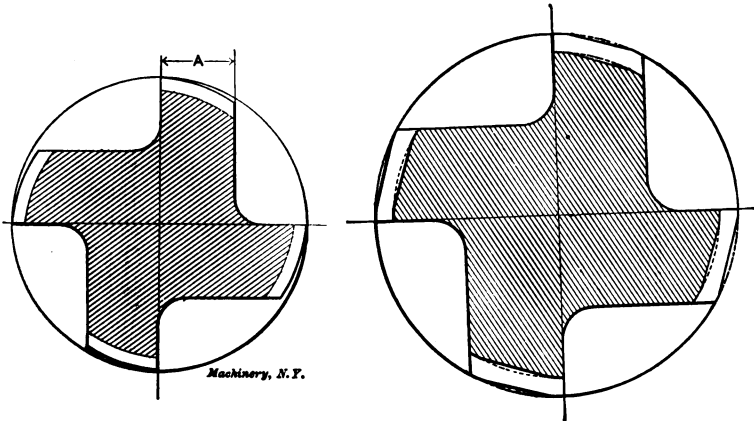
Section of Tap Relieved both on Top and in Angle of Thread
